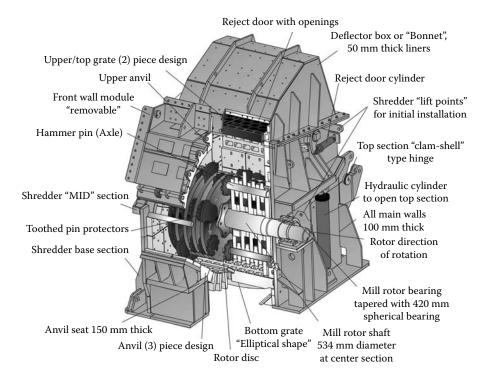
Exploded view of hammer-mill shredder. (From Metso Texas Shredder. With permission.)
